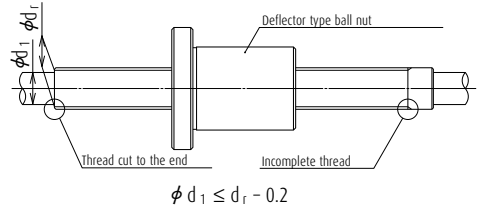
Shaft end of a deflector recirculation system ball screw
